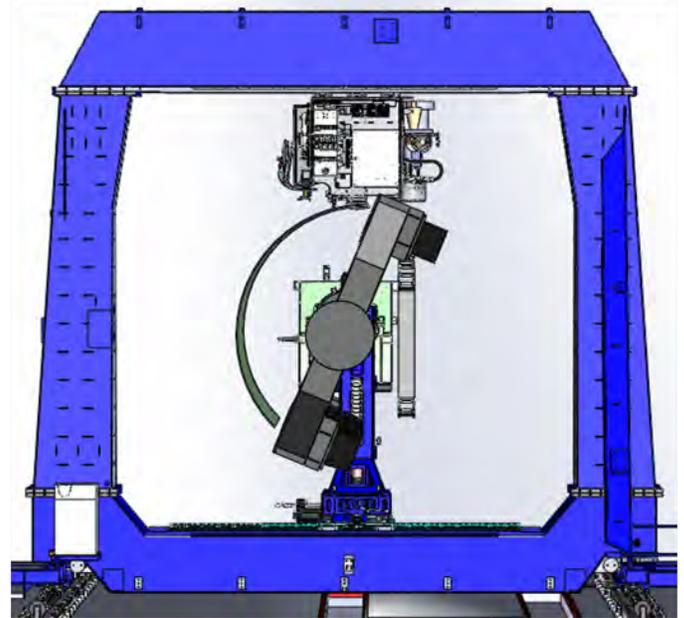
Collision of the picture frame with the lower head would obstruct machine access near panel edges
